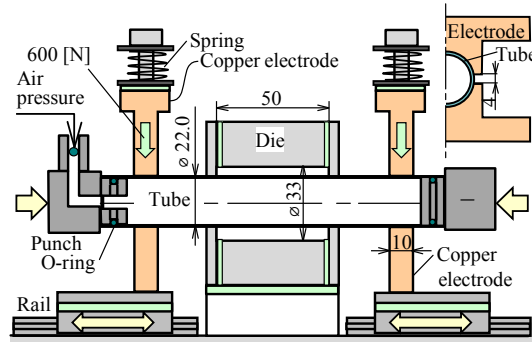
Experimental apparatus for gas forming of aluminium alloy tube using air filled into sealed tube and resistance heating.
